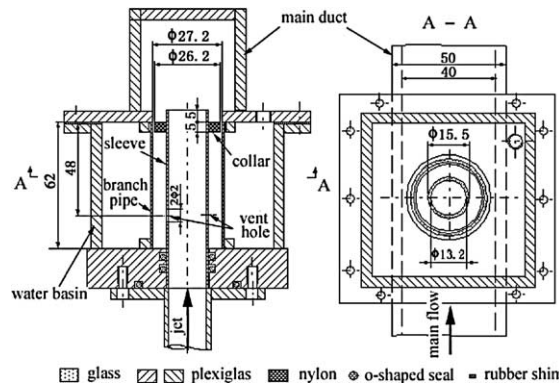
Cutaway view of cross section at the jet hole center and A–A view (unit: mm).
